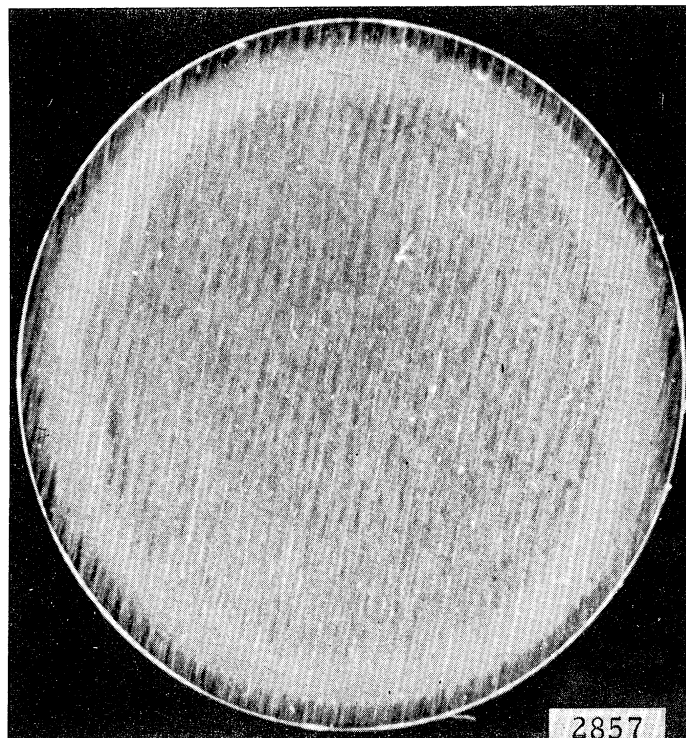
Horn Tip Attachment After 3.25 Hours of Testing
